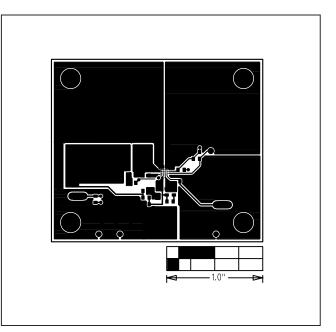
MAX15040 EV Kit Component PCB Layout— Component Side
